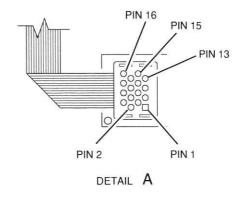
34A5A22 Power Supply Assembly Component Locator Diagram
